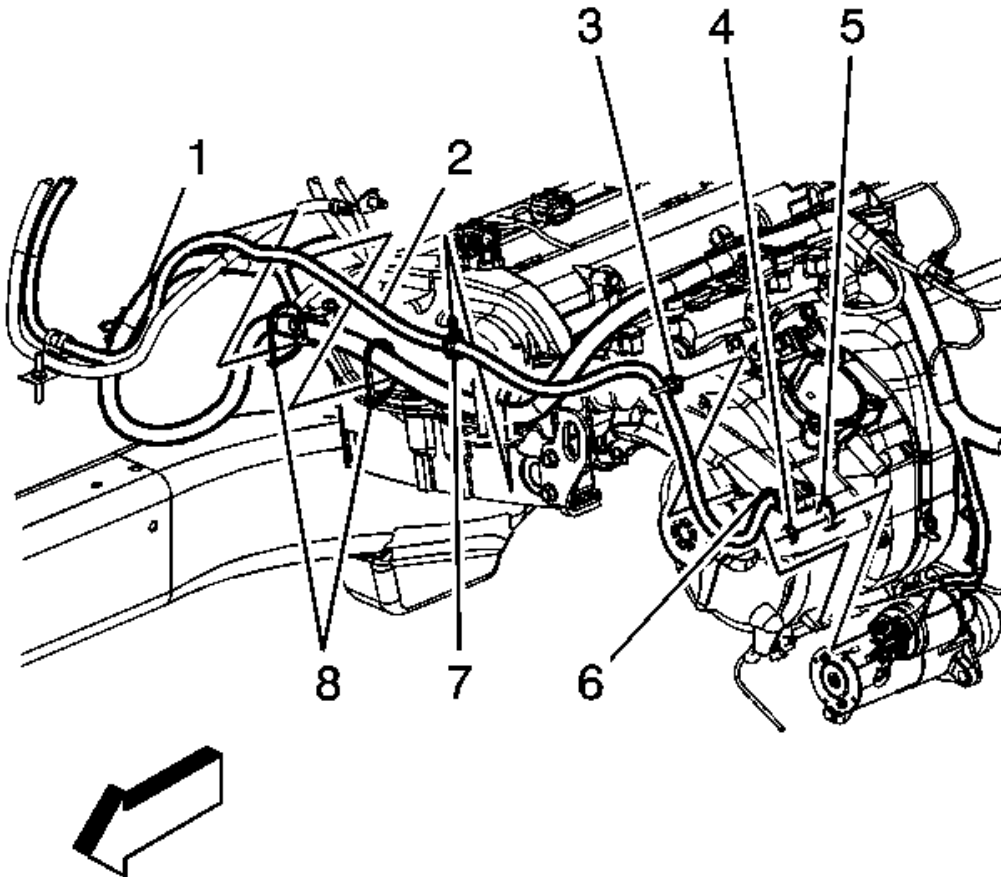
Identifying Engine Harness Tie Straps & Cable Clips
